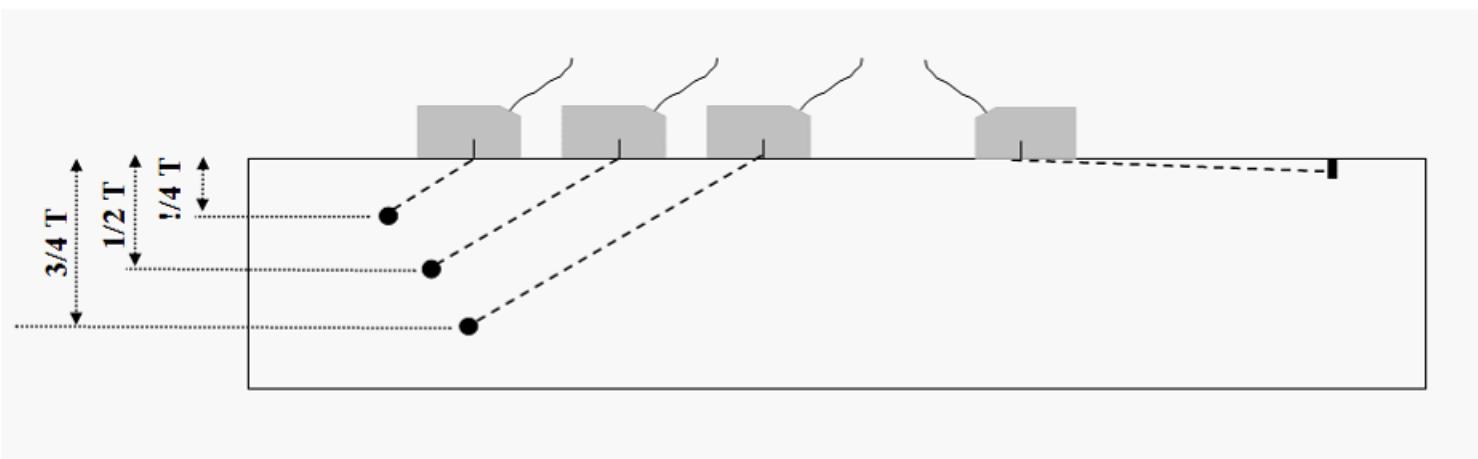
Reference block for construction of DAC, duplex stainless steel
